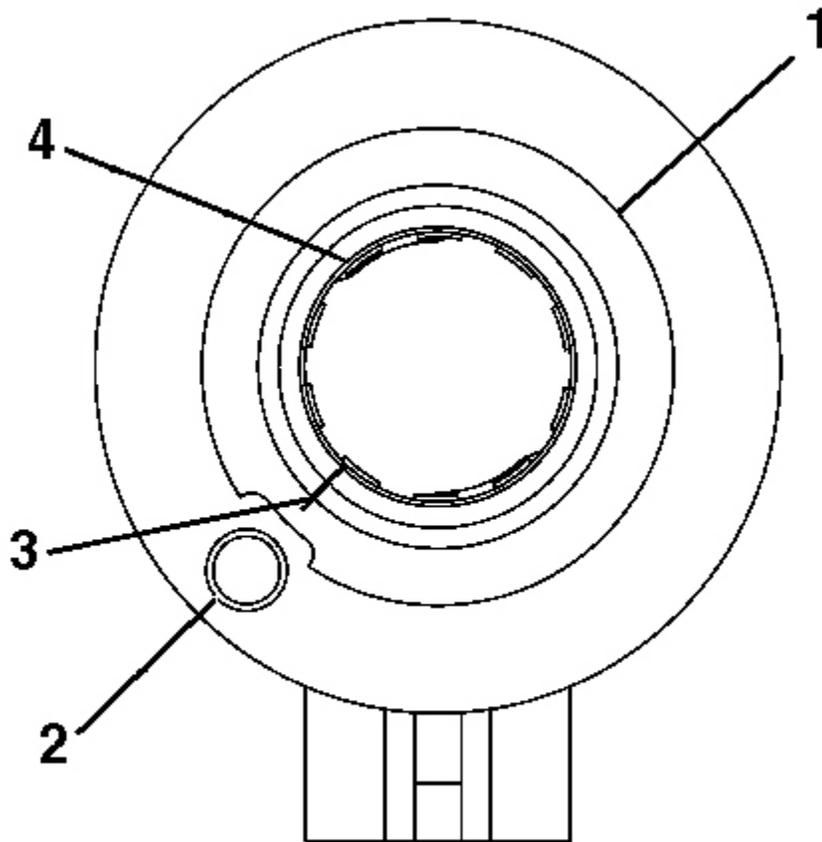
Steering Wheel Position Sensor Rotor Flange Cuff, Centering Pin Hole And Alignment Mark
